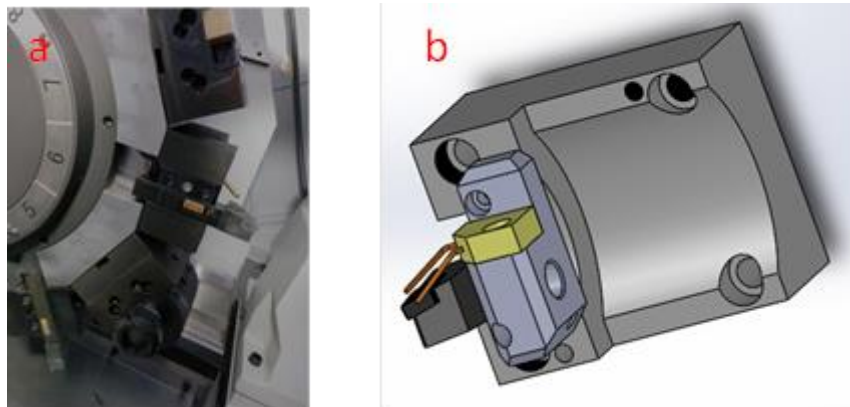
a) View of the turrets installed on the revolver of the CNC lathe and b) 3D CAD model of the nozzles system.
